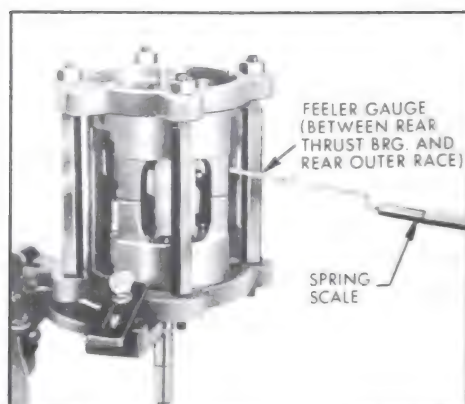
Checking Selected Feeler Gauge with Spring Scale
